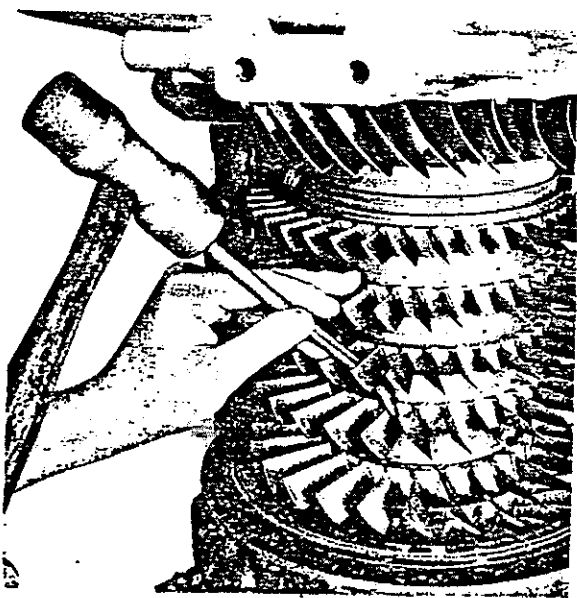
Removing Second Stage Compressor Rotor Blade
